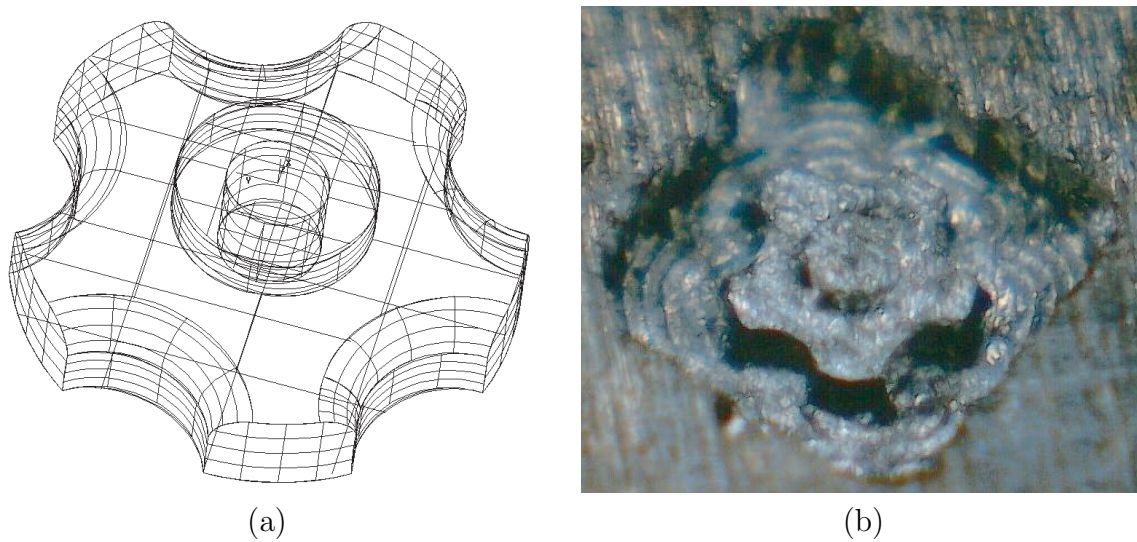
The micro gear (a) computer generated wire-frame model (b) picture taken with the digital camera of the machined gear
